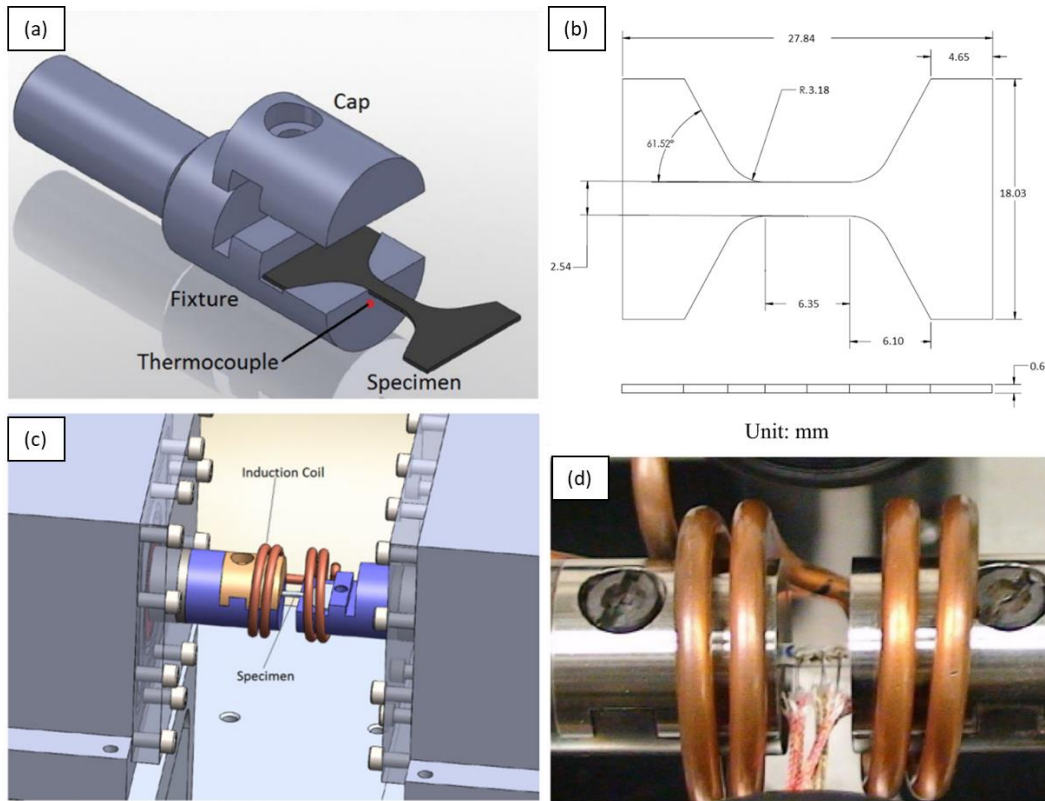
(a) Engineering Model of Pinch-Plate Gripping System. (b) Drawing of Subscale Tensile Specimen Geometry. (c) Engineering Model and (d) Experimental Assembly of Grip and Inductor [52].
